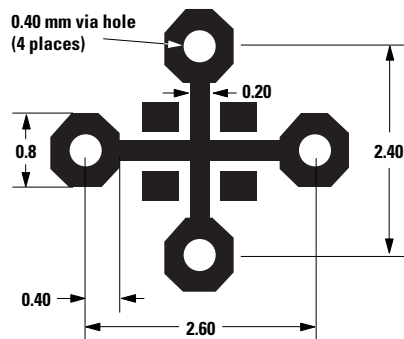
PCB Pad Layout, High Isolation MiniPak (dimensions in mm).
